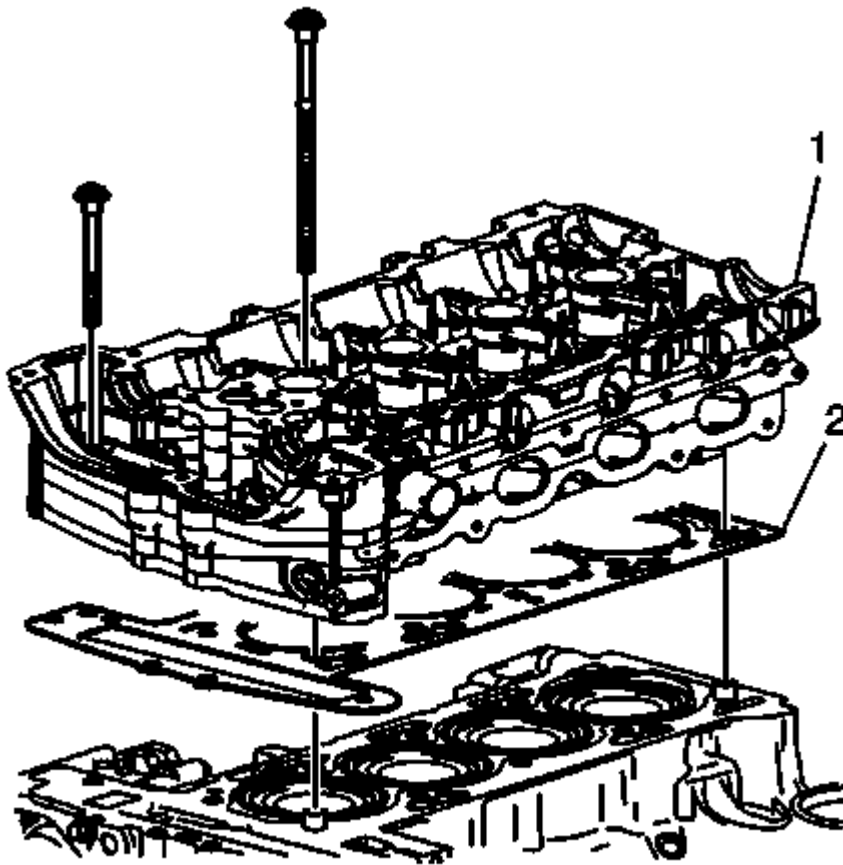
View of Cylinder Head Gasket and Cylinder Head
